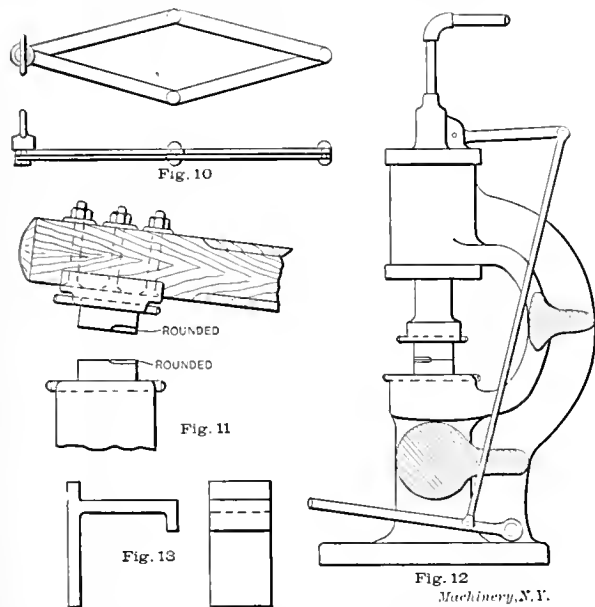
Gage for Setting Adjustable Die to any angle. Fig. 11. Common, but Objectionable, Way of Placing Dies in Helve Hammer. Fig. 12. General Appearance of Pneumatic Hammer for Light Forging. Fig. 13. Piece that can be forged to Advantage in the Forging Machine
